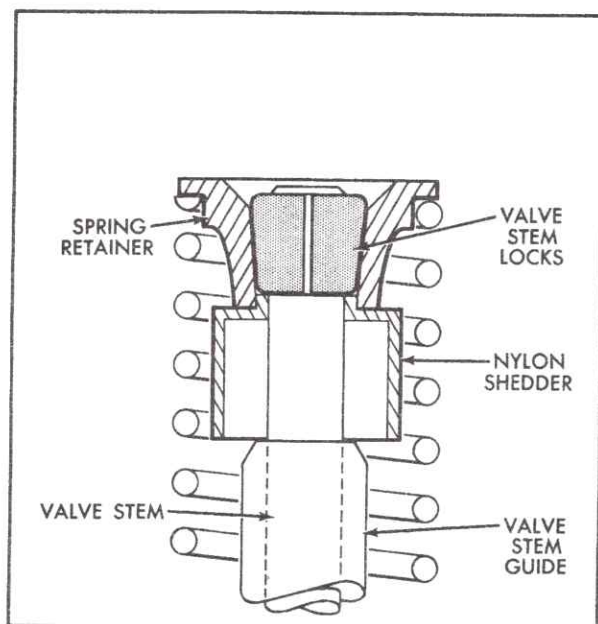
Valve Spring Retainer and Oil Shedder
